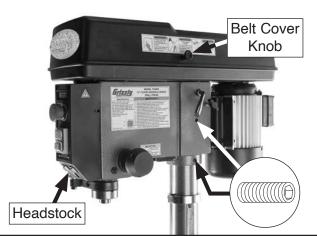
Belt cover knob installed and headstock placed on column (T33960 shown).
